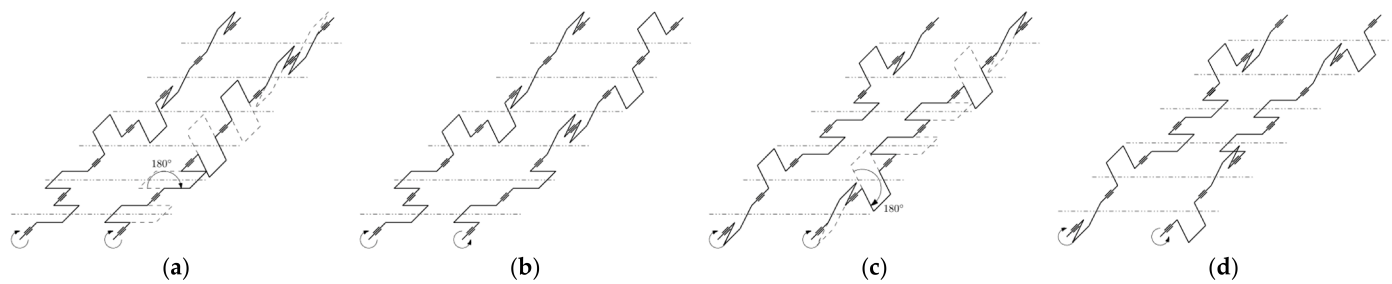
Crankshafts layouts of all configurations. (a) six-cylinder co-rotating crankshafts with a crank throw angle of 60°; (b) six-cylinder counter-rotating crankshafts with a crank throw angle of 60°; (c) six-cylinder co-rotating crankshafts with a crank throw angle of 120°; (d) six-cylinder counter-rotating crankshafts with a crank throw angle of 120°.
